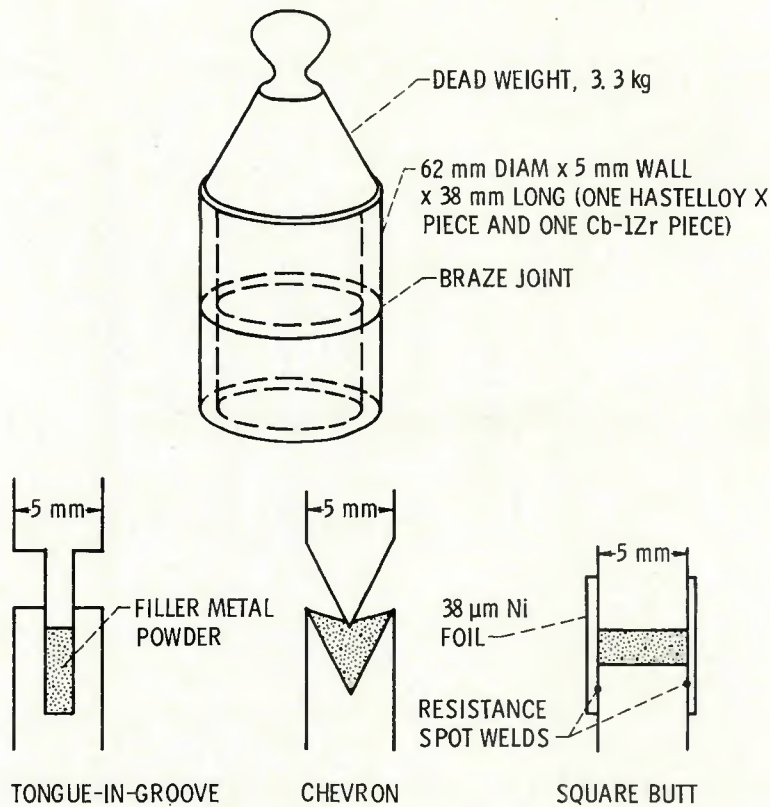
The arrangement, loading and filler metal placement for brazing butt joints in 62 mm diameter pipe
